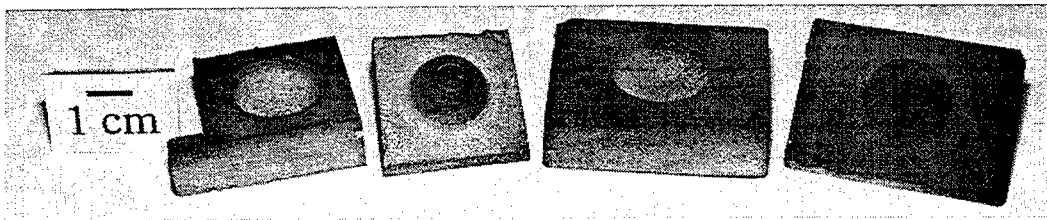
Sintered Nickel Die Set from SLA Molds (left), and Sintered SS316 Die Set From NC Machined Molds (right)
